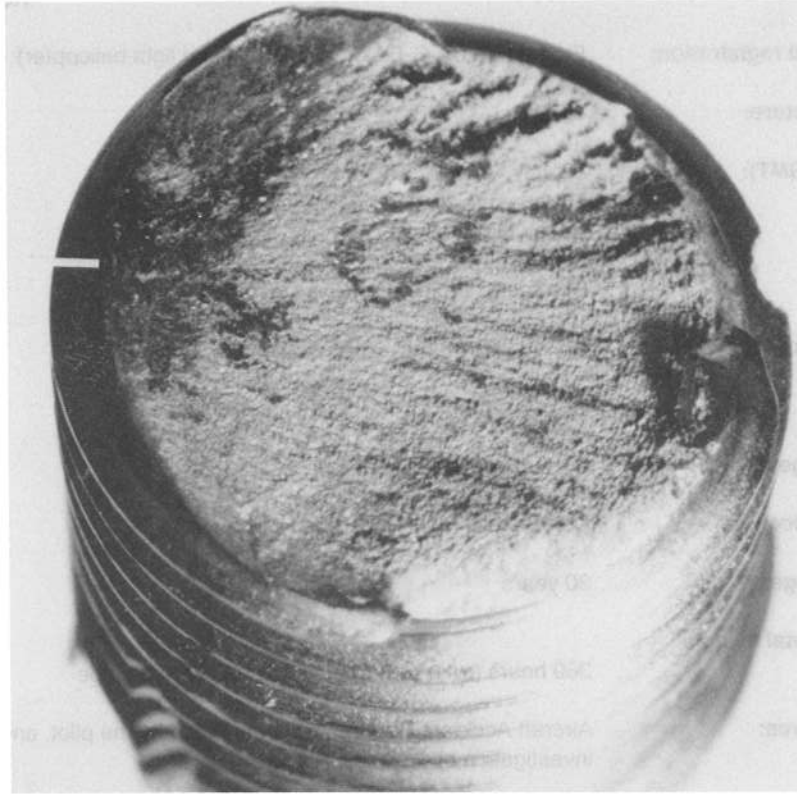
FRACTURE OF FIRST BOLT TO FAIL
